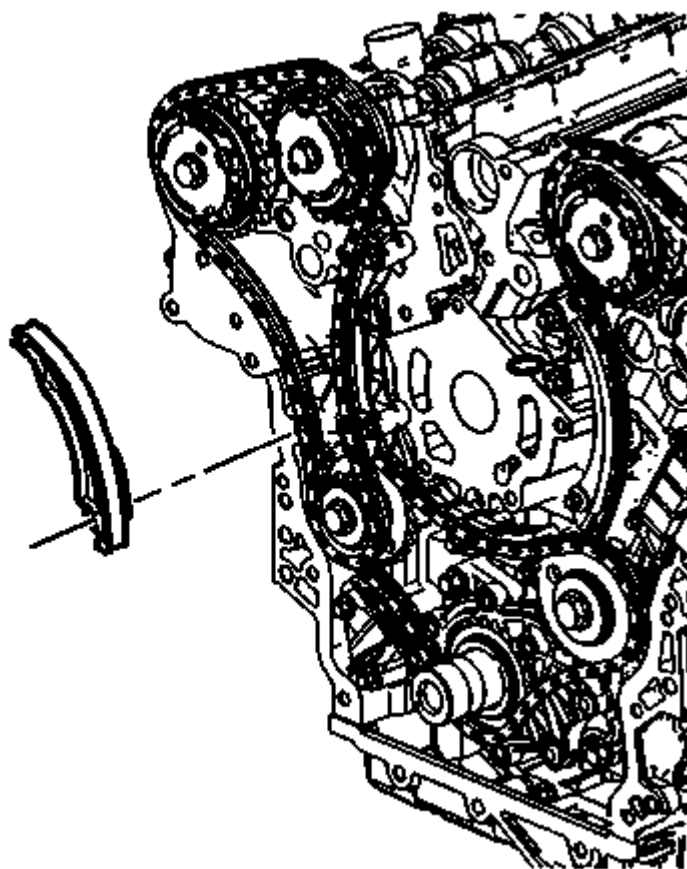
View Of Right Secondary Camshaft Drive Chain Shoe
